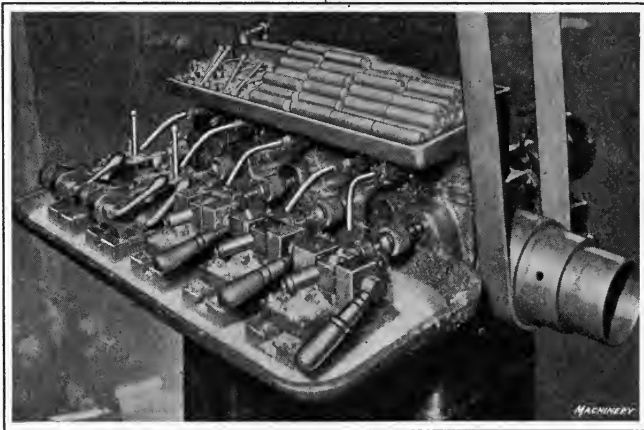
Five-spindle Semi-automatic Drilling Machine
